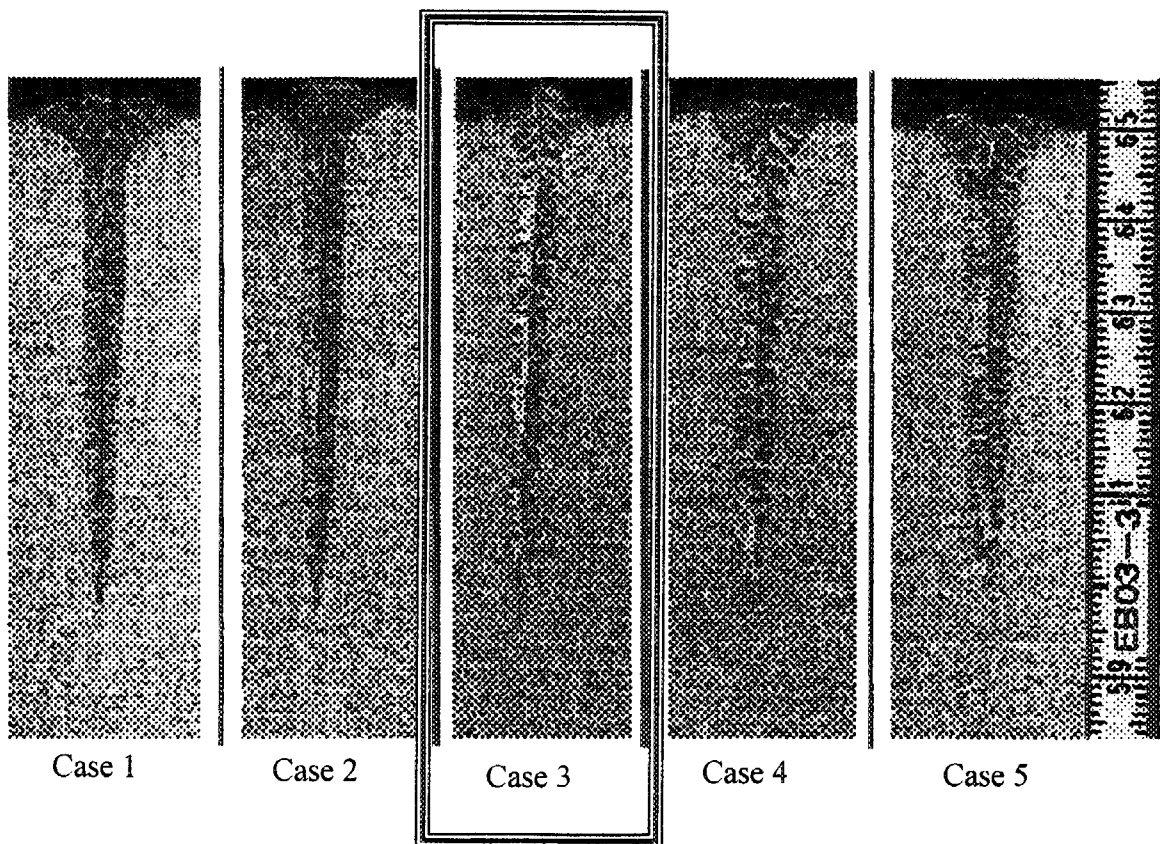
Macroscopic photographs of cross sectional view of welding bead by high voltage welder tests
